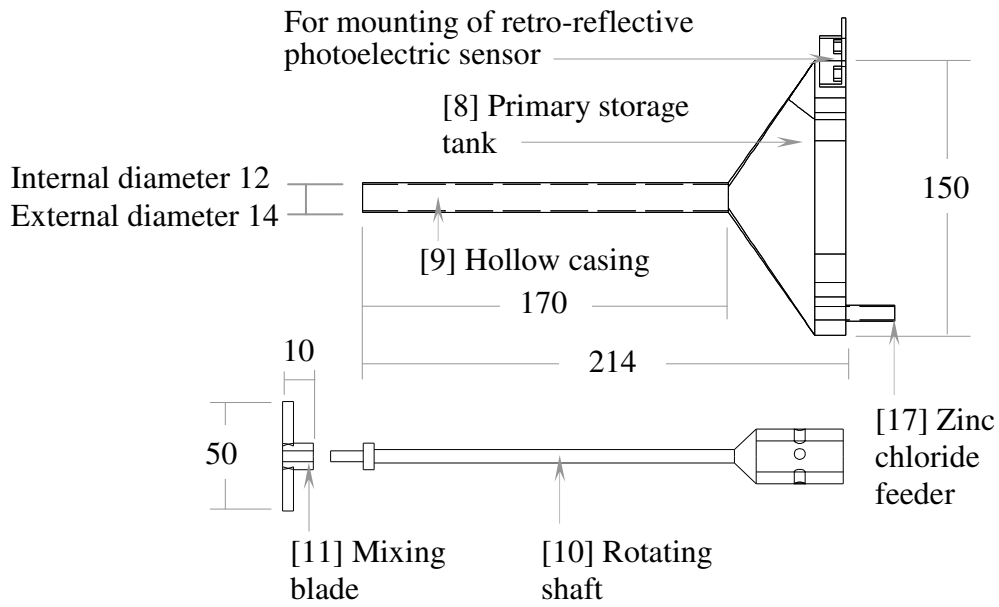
Schematic of in-flight DM cutting and mixing equipment (all dimensions in mm).
